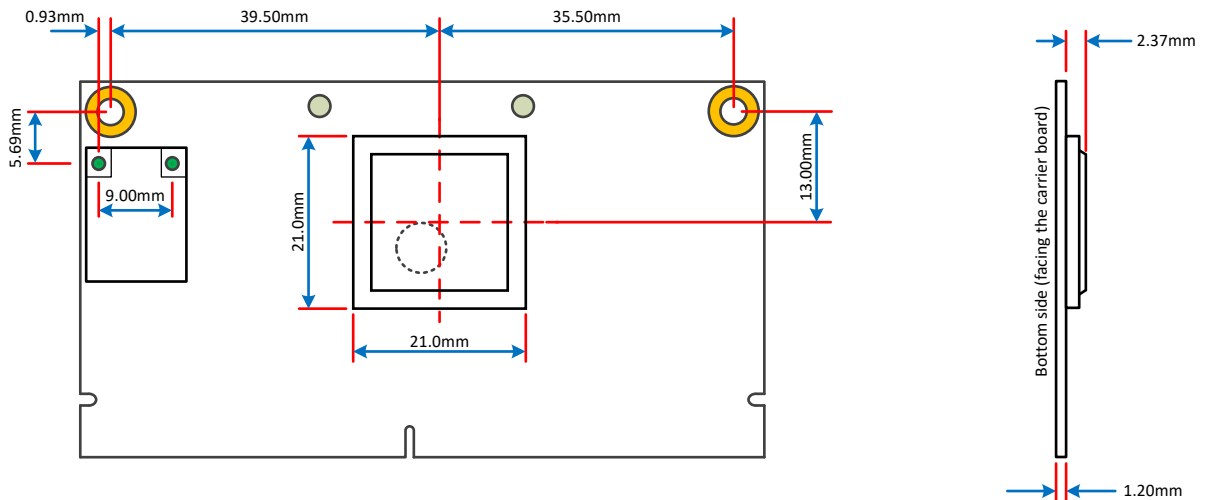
Mechanical position of i.MX 8X SoC (top view)
